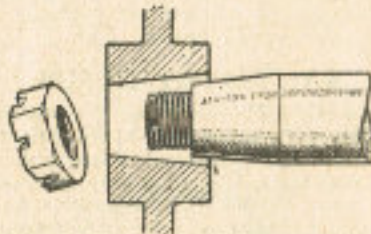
Pulley or pinion can often be fitted without using a key, provided the tapered shaft fits snugly.
